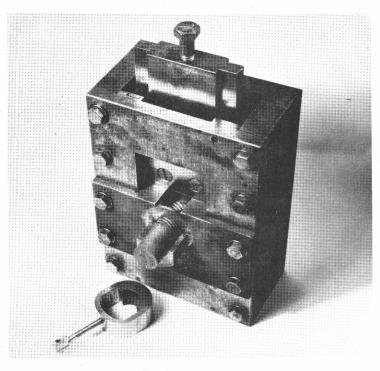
Modified shear tool for testing glue joints in cylindrical plugs. A device for holding the specimen securely in place during test is shown in front of the tool.
